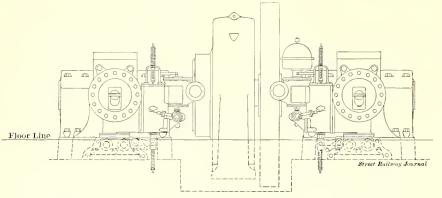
END SECTION OF 1500-HP HORIZONTAL GAS ENGINE
